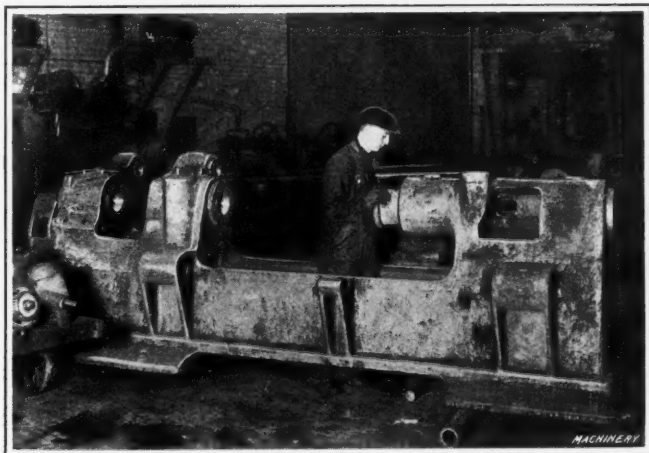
Bed Casting with All Spindle and Shaft Bearings in Place. Note Truck Load of Parts at Left-hand Side of Machine
